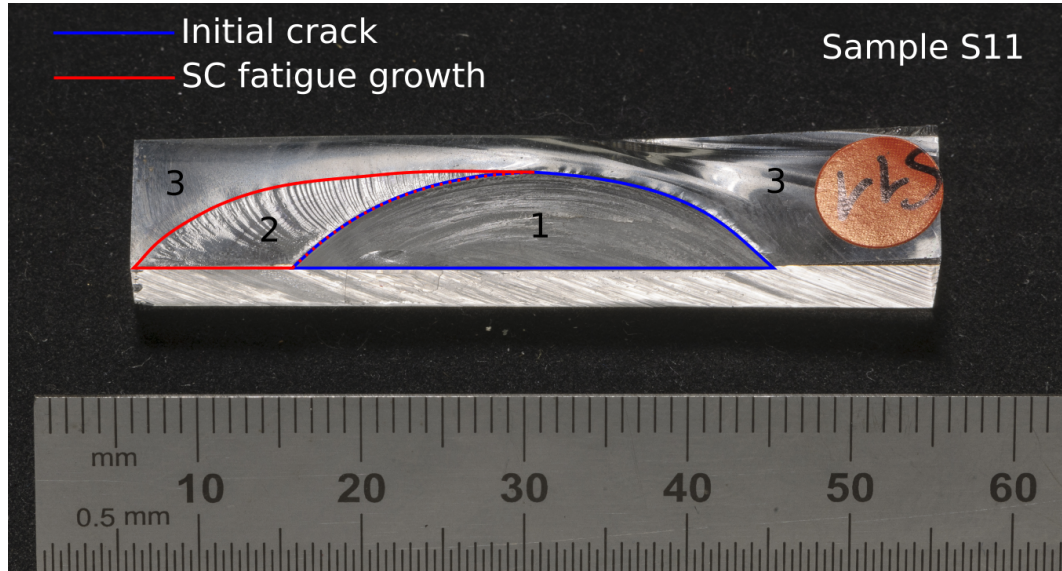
Test on Perspex plate - Fracture surface - Sample S11
